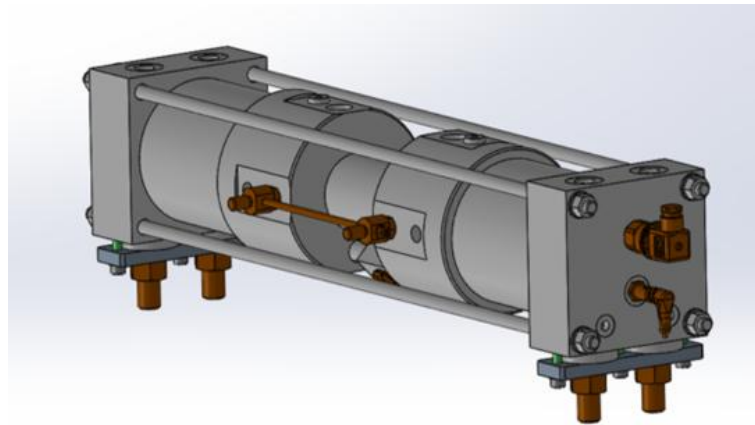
Isometric view of the assembly of the expander of the IEE prototype.
